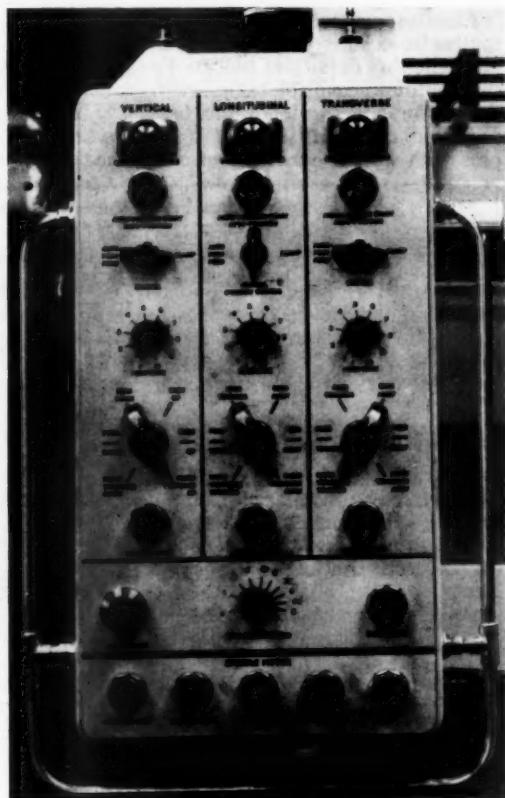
(right).—The pendant unit for controlling the operation of the electronic equipment. Push buttons control the main spindle motor, the automatic card reader on the control desk and the traverse motions. Rotary switches are used to select setting sequence, slideway clamping and feed rates
